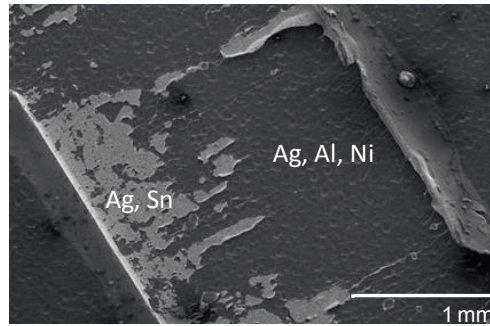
REM images of solder area on metalized wafers after the peel test. The sample has a 150 nm thick Ni:Si layer and is soldered with L1 and F2 directly after processing. The image shows a mixed mode fracture of cohesive fracture in the solder and an interface fracture between solder and the Ni:Si-layer.
